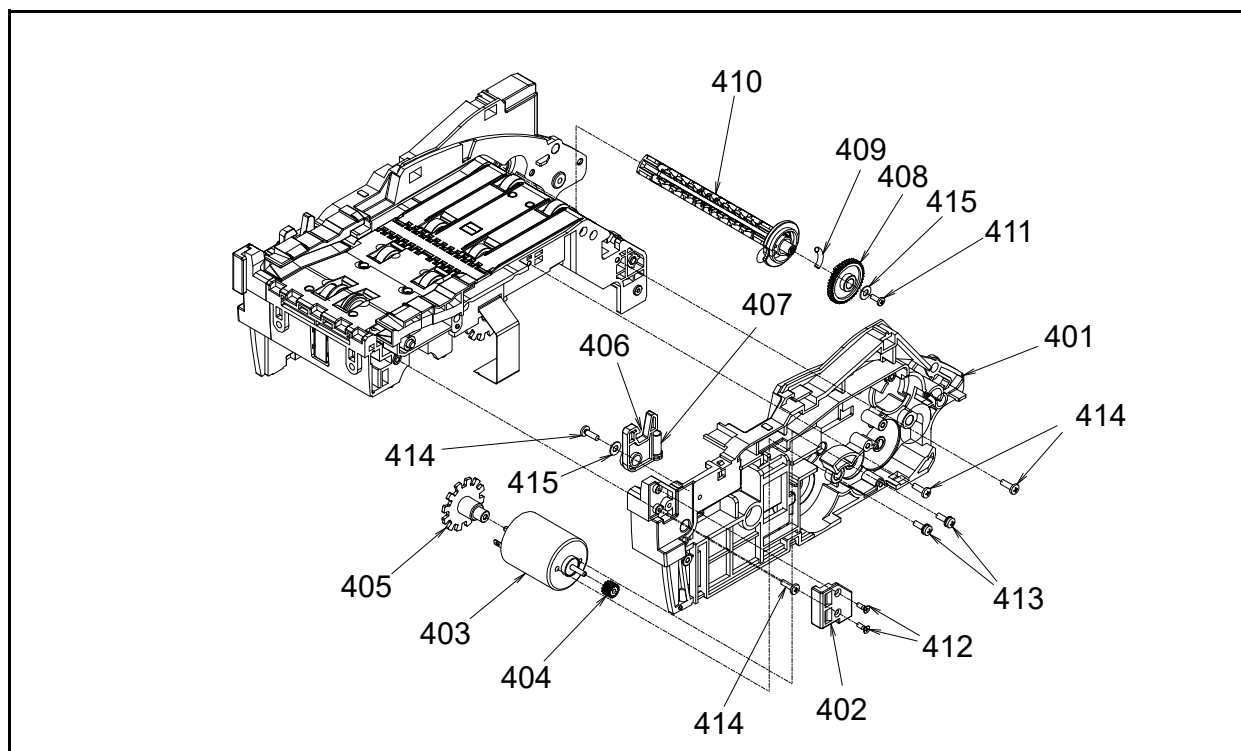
UBA Pro Transport Unit Exploded View 3
